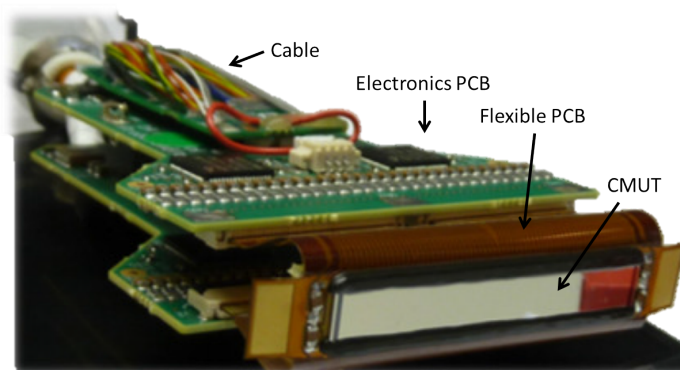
Flexible PCB with a CMUT chip connected to the probe handle PCB for demonstration purpose. The chip mounted on the flexible PCB is seen in the front and the cable toward the back.
